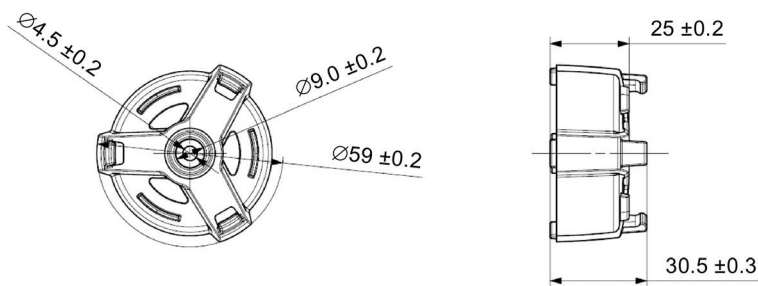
Dimension drawing of spacer 6GT2690-0AL00
